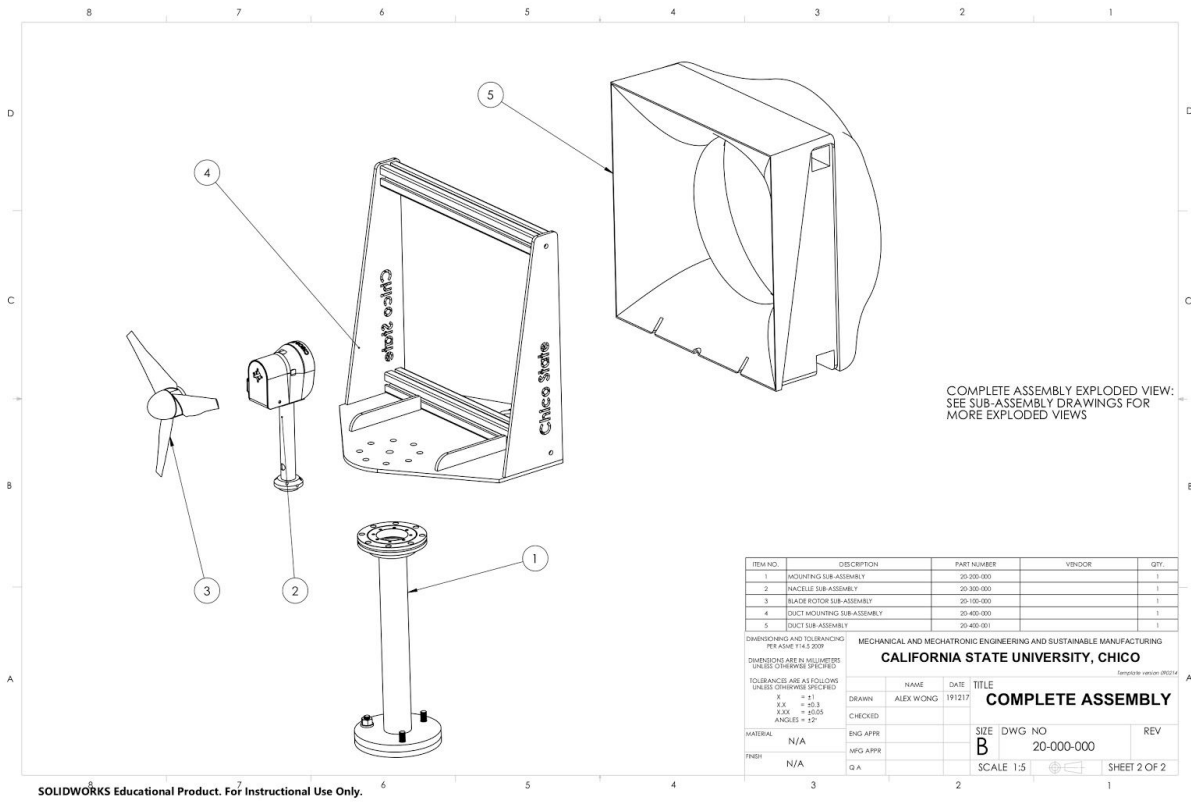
Engineering mechanical drawing of all components in exploded assembly.
